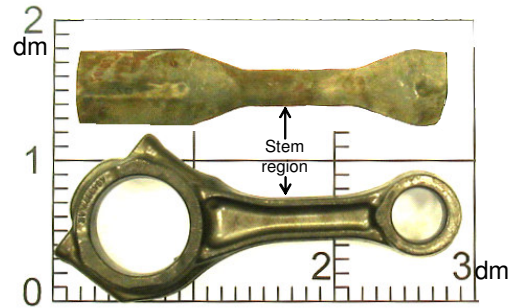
Dimensions of rolled workpiece and final conrod.
